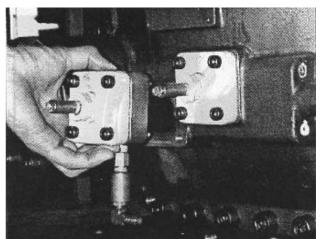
Removing the Solenoid valve and Solenoid Valve Plate.
